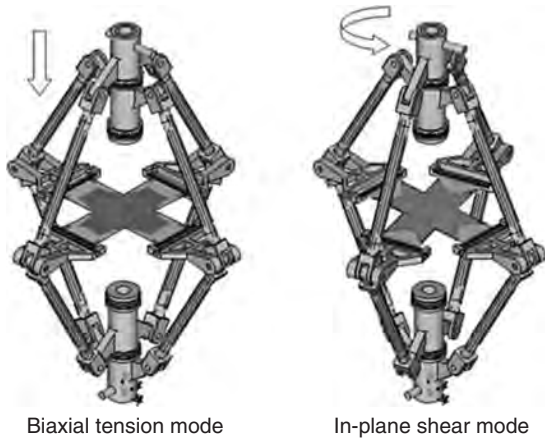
Combined biaxial tension and in-plane shear test fixture. (U.S. Patent No. 6,860,156.)
